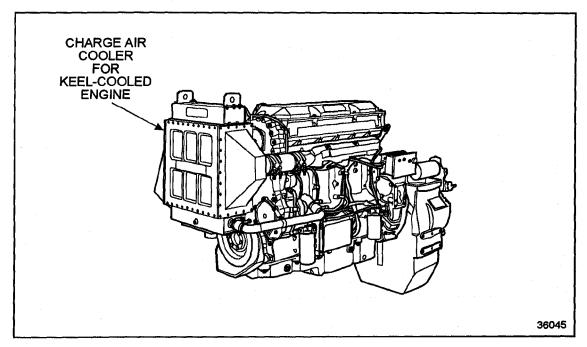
Typical Charge Air Cooler for Keel-Cooled Engine
